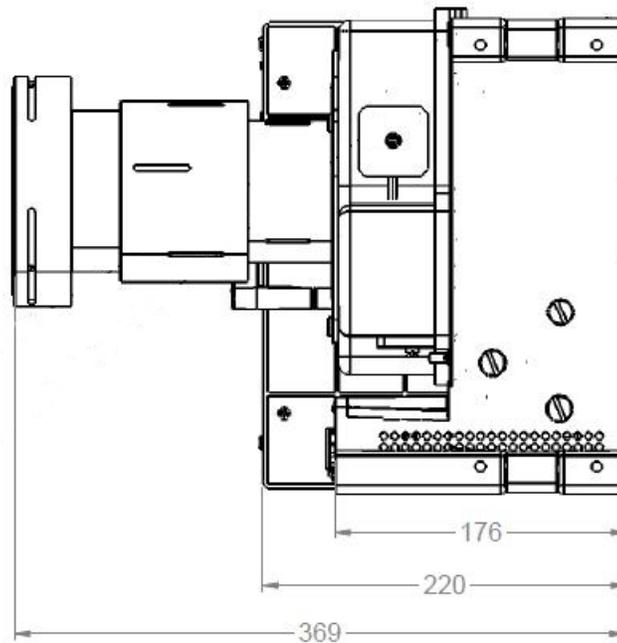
Mirage WU-L Side Dimensions with 1.2 - 1.6:1 Lens
